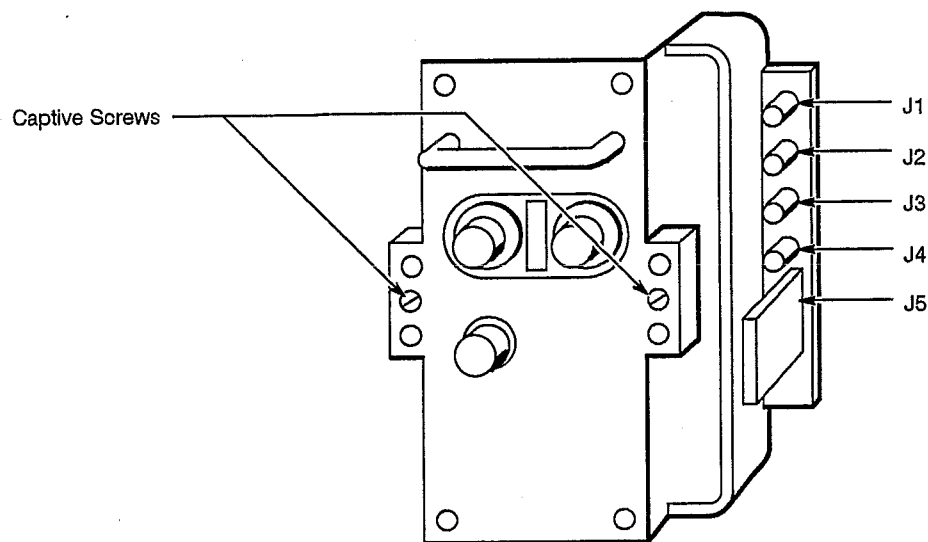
Scan Converter Rack assembly right-side connectors and captive screws.
